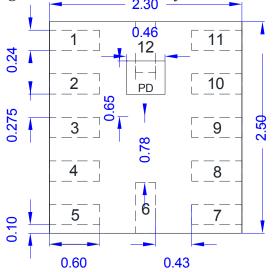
Package Top View Schematic (2.3\*2.5\*0.6mm (±0.1mm))
